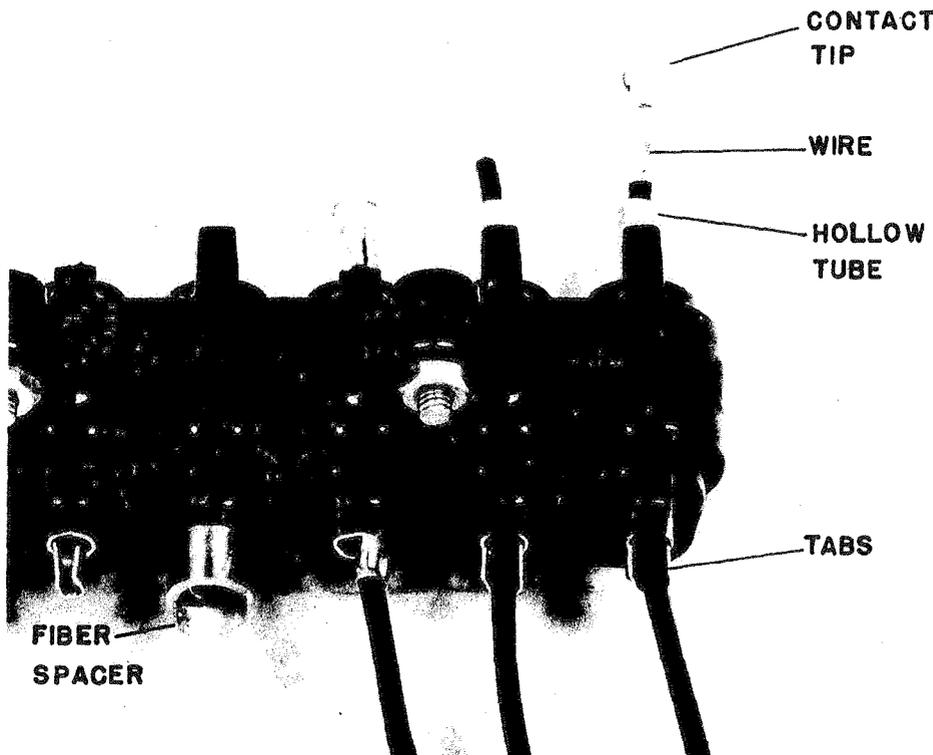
Assembly of Movable Portion of Secondary Disconnects
